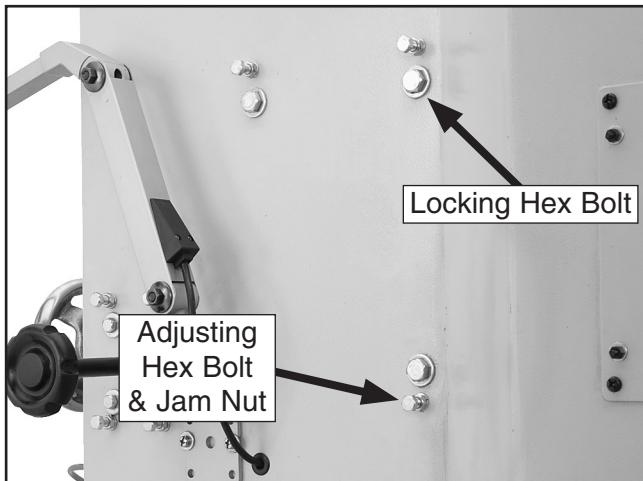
Model G8146Z upper wheel adjusting fasteners.
